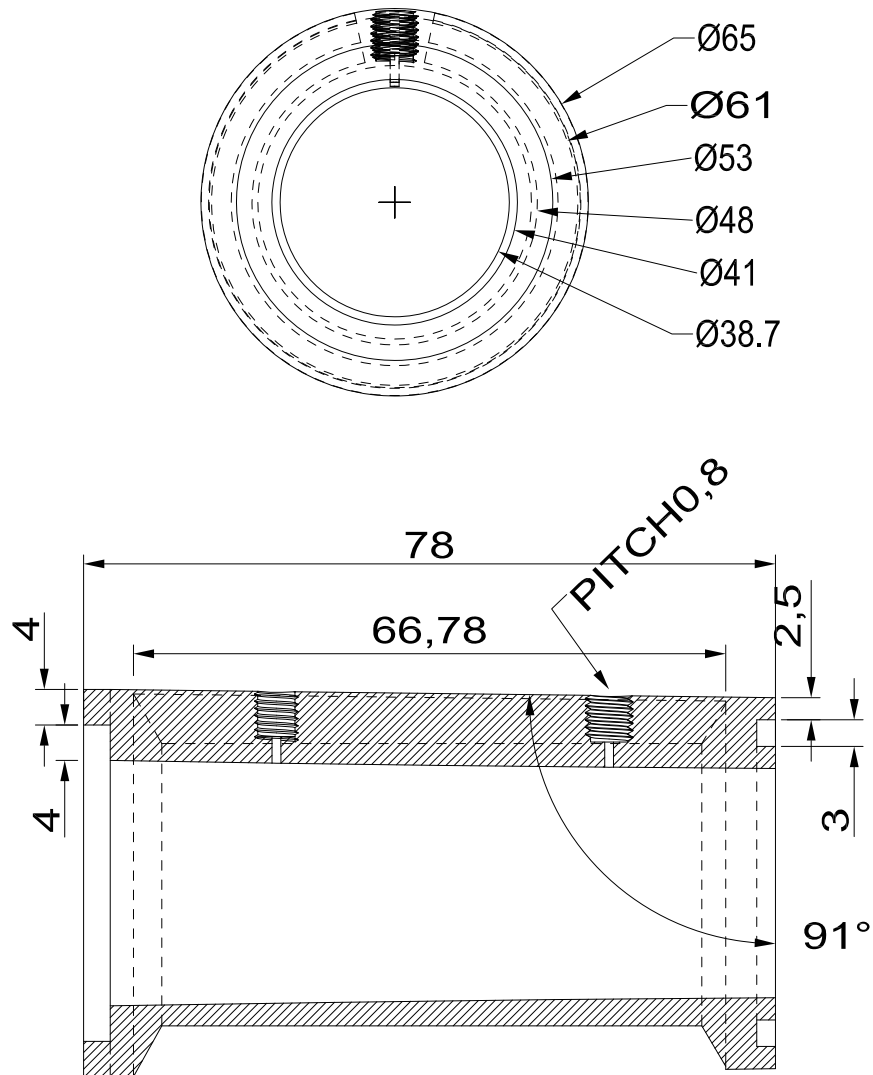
Profile of the part 1 of CRMC ejector with main dimensions, all dimensions in mm.
